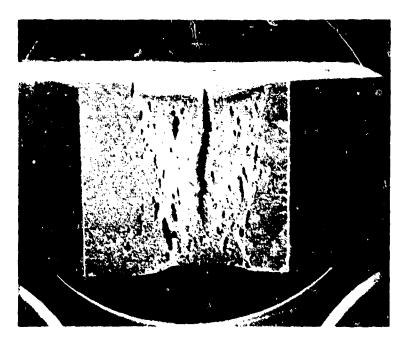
Fatigue fracture surface of A-588 steel, 8x.
